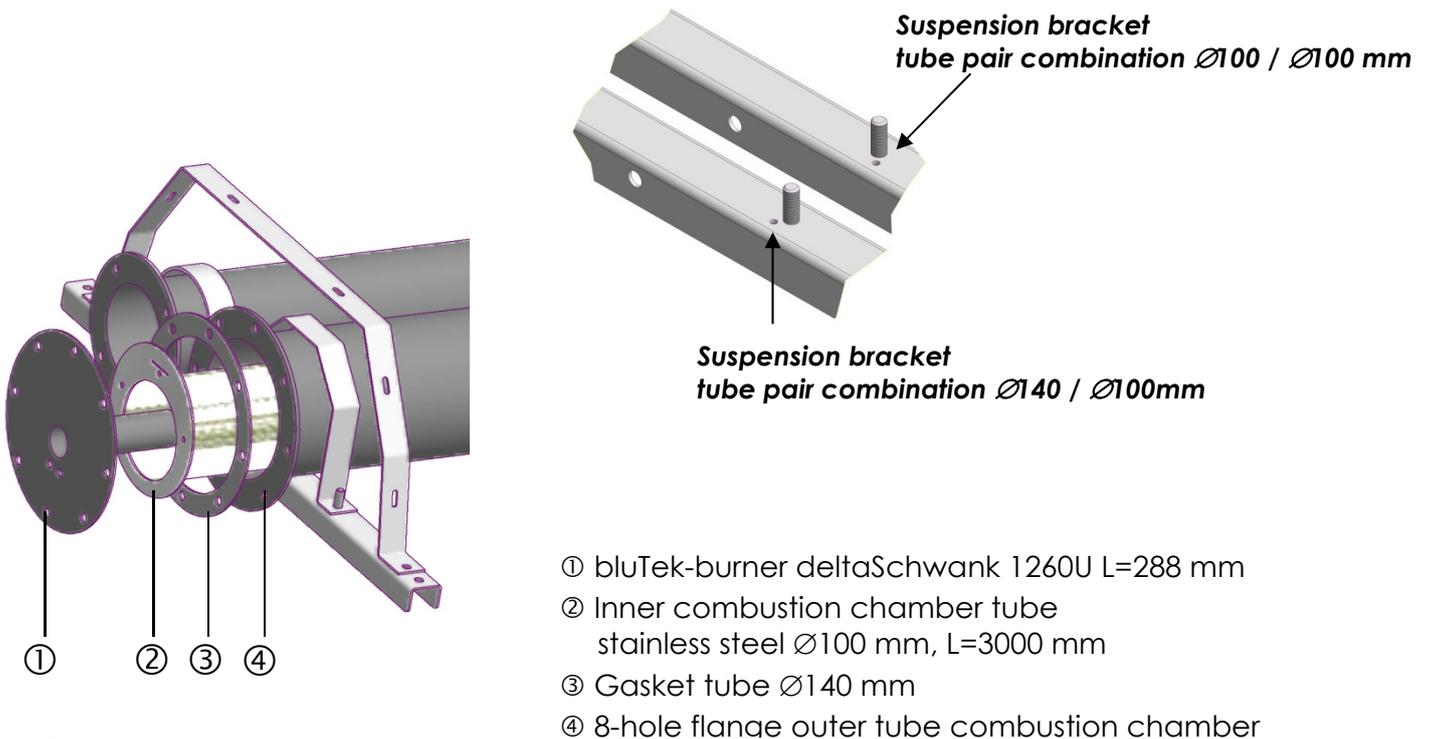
Mounting interface combustion chamber deltaSchwank 1260U
